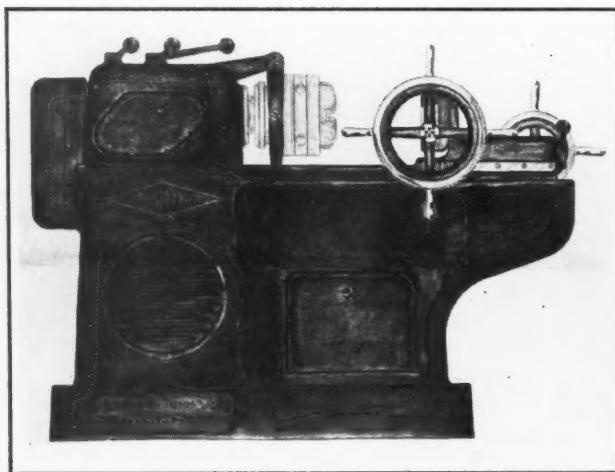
Example of Shading on an Assembly Drawing, which is Done to Present a Clearer Picture of the Machine, and Gives the Effect of a Photograph
